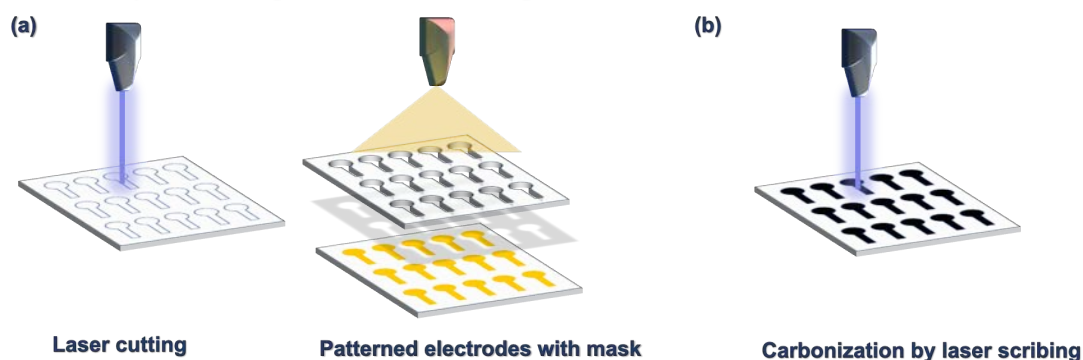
Electrode fabrication by (a) laser cutting and (b) scribing
